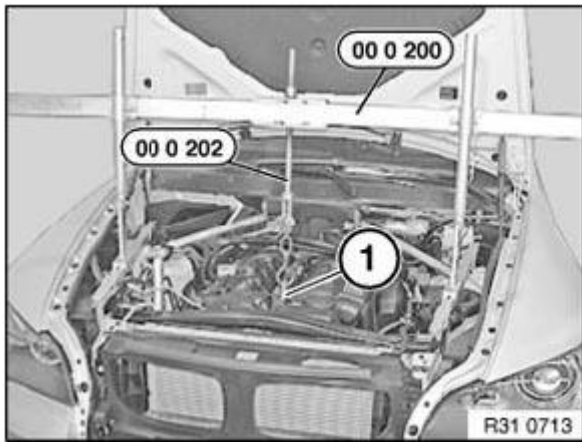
Identifying Spindle 00 0 202 And Towing Hook
